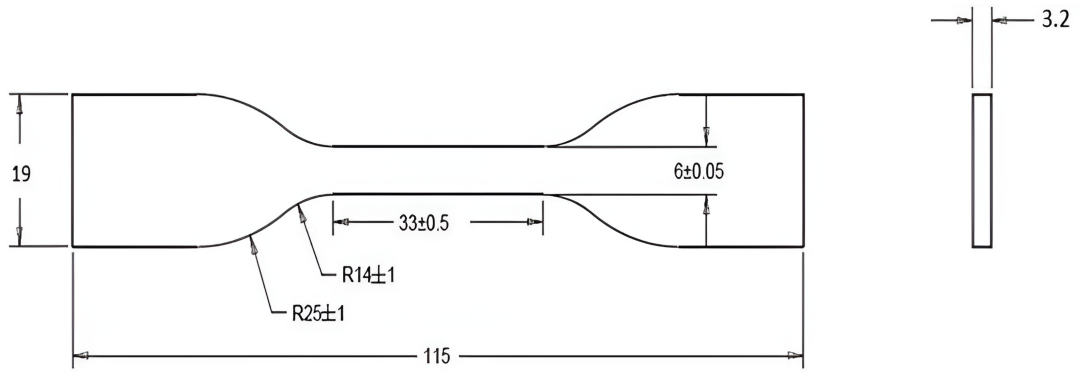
Original dimensions of ASTM D638 Type IV specimen [47]
